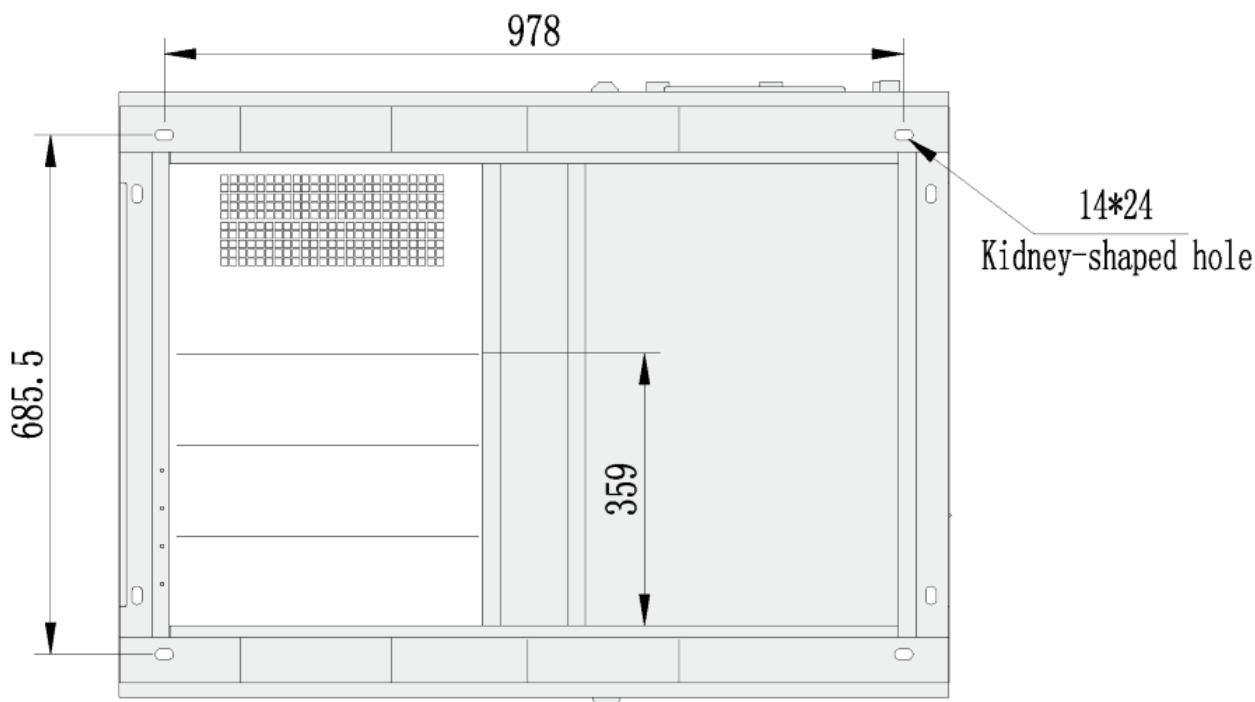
the DC-DC Converter rack wiring hole in bottom view
